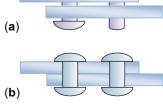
(a) Hot rivets inserted (b) after hammering, rivets are cold down.
